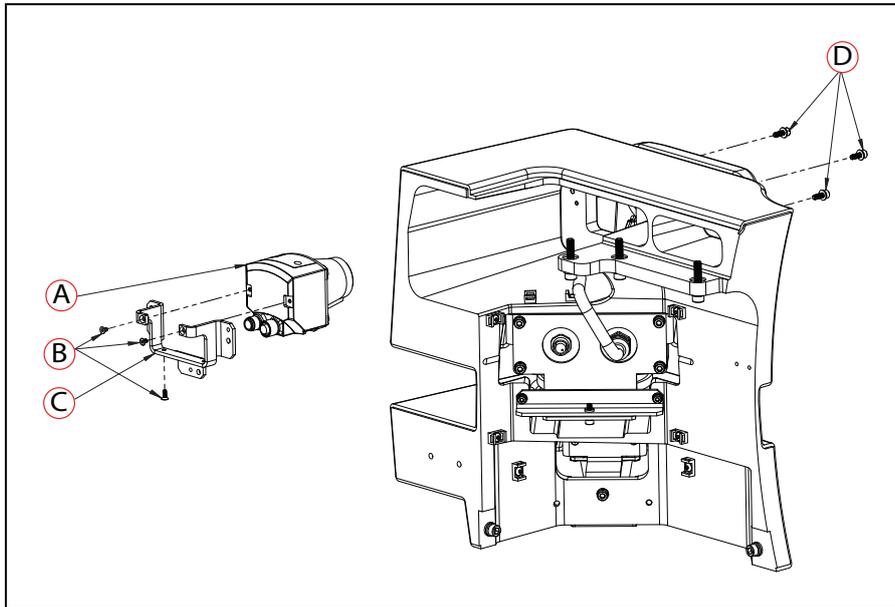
(A) Side Laser, (B) M3 Screw, (C) Laser Bracket, and (D) M4 Screw
